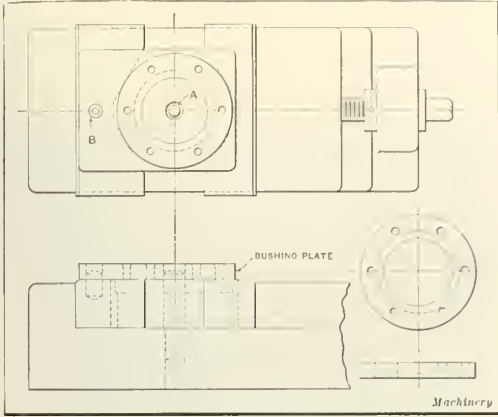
Drilling Holes on a Circle with Removable Bushing Plate
